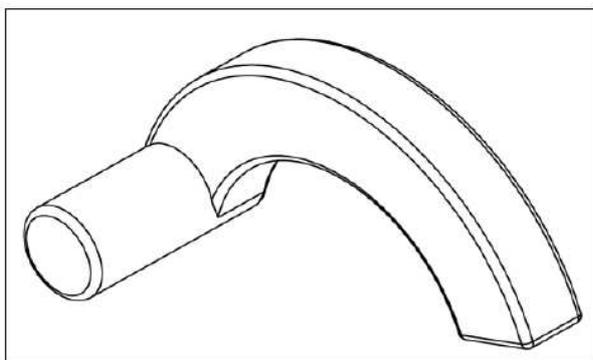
3D Model of the angular bushing for the hydraulic motor
